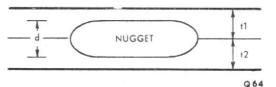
Section through weld, giving dimensions for measuring weld penetration.
